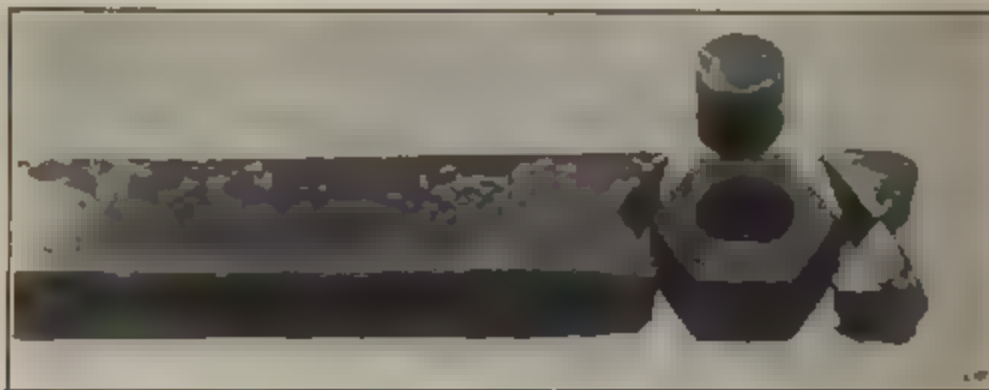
Showing how a Hexagon Nut is produced from Rectangular Bar in a Hot-pressed Nut Machine
